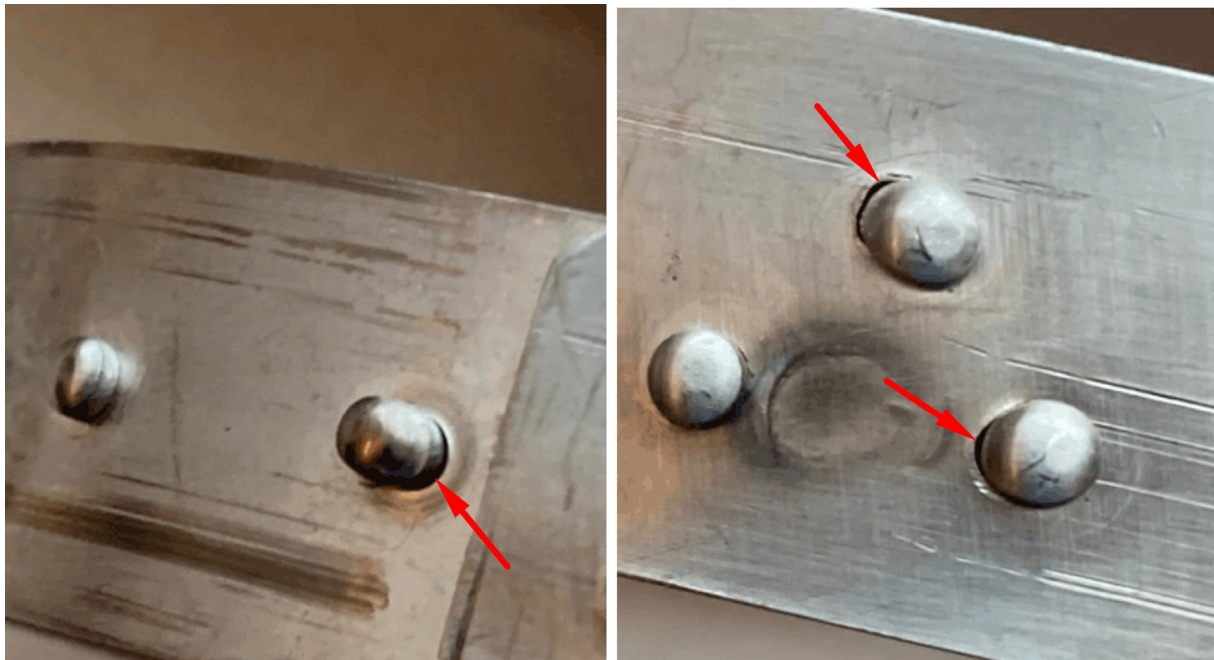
Suspect Rivets Installed on Part No. 670105 Clamps
